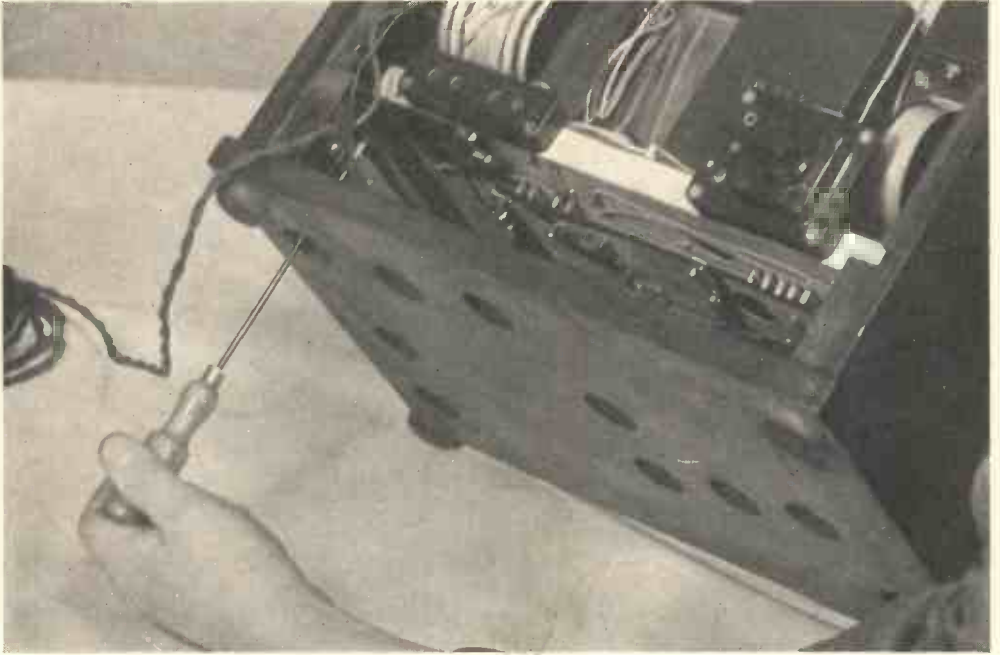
THIS SHOWS THE METHOD OF RELEASING THE CHASSIS SCREWS.
